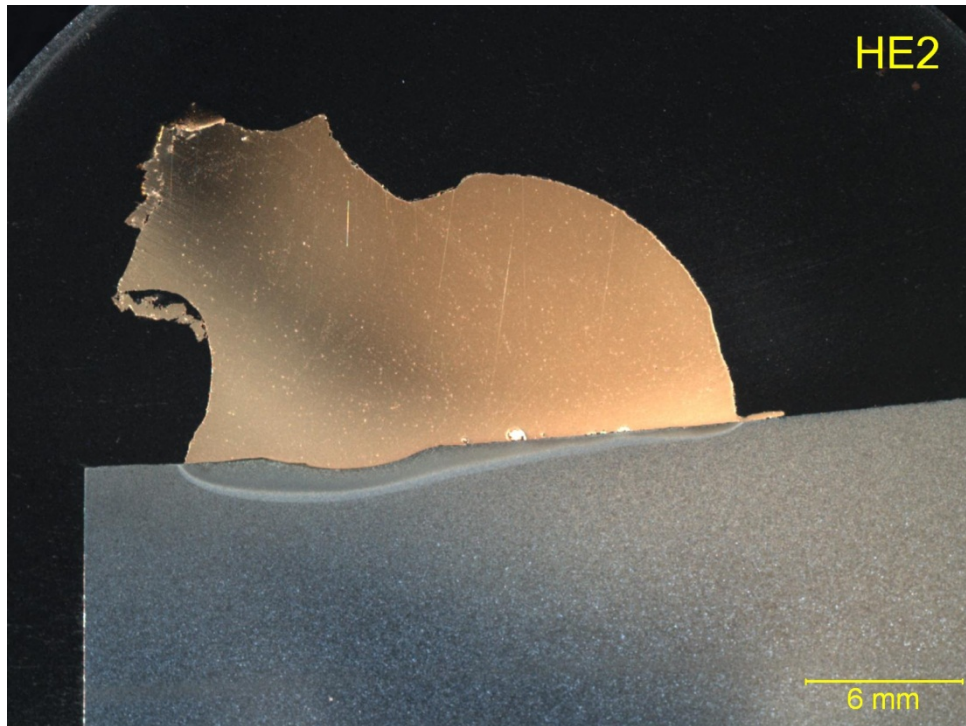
CAD Weld Joint Hyper-Eutectoid Rail #2
